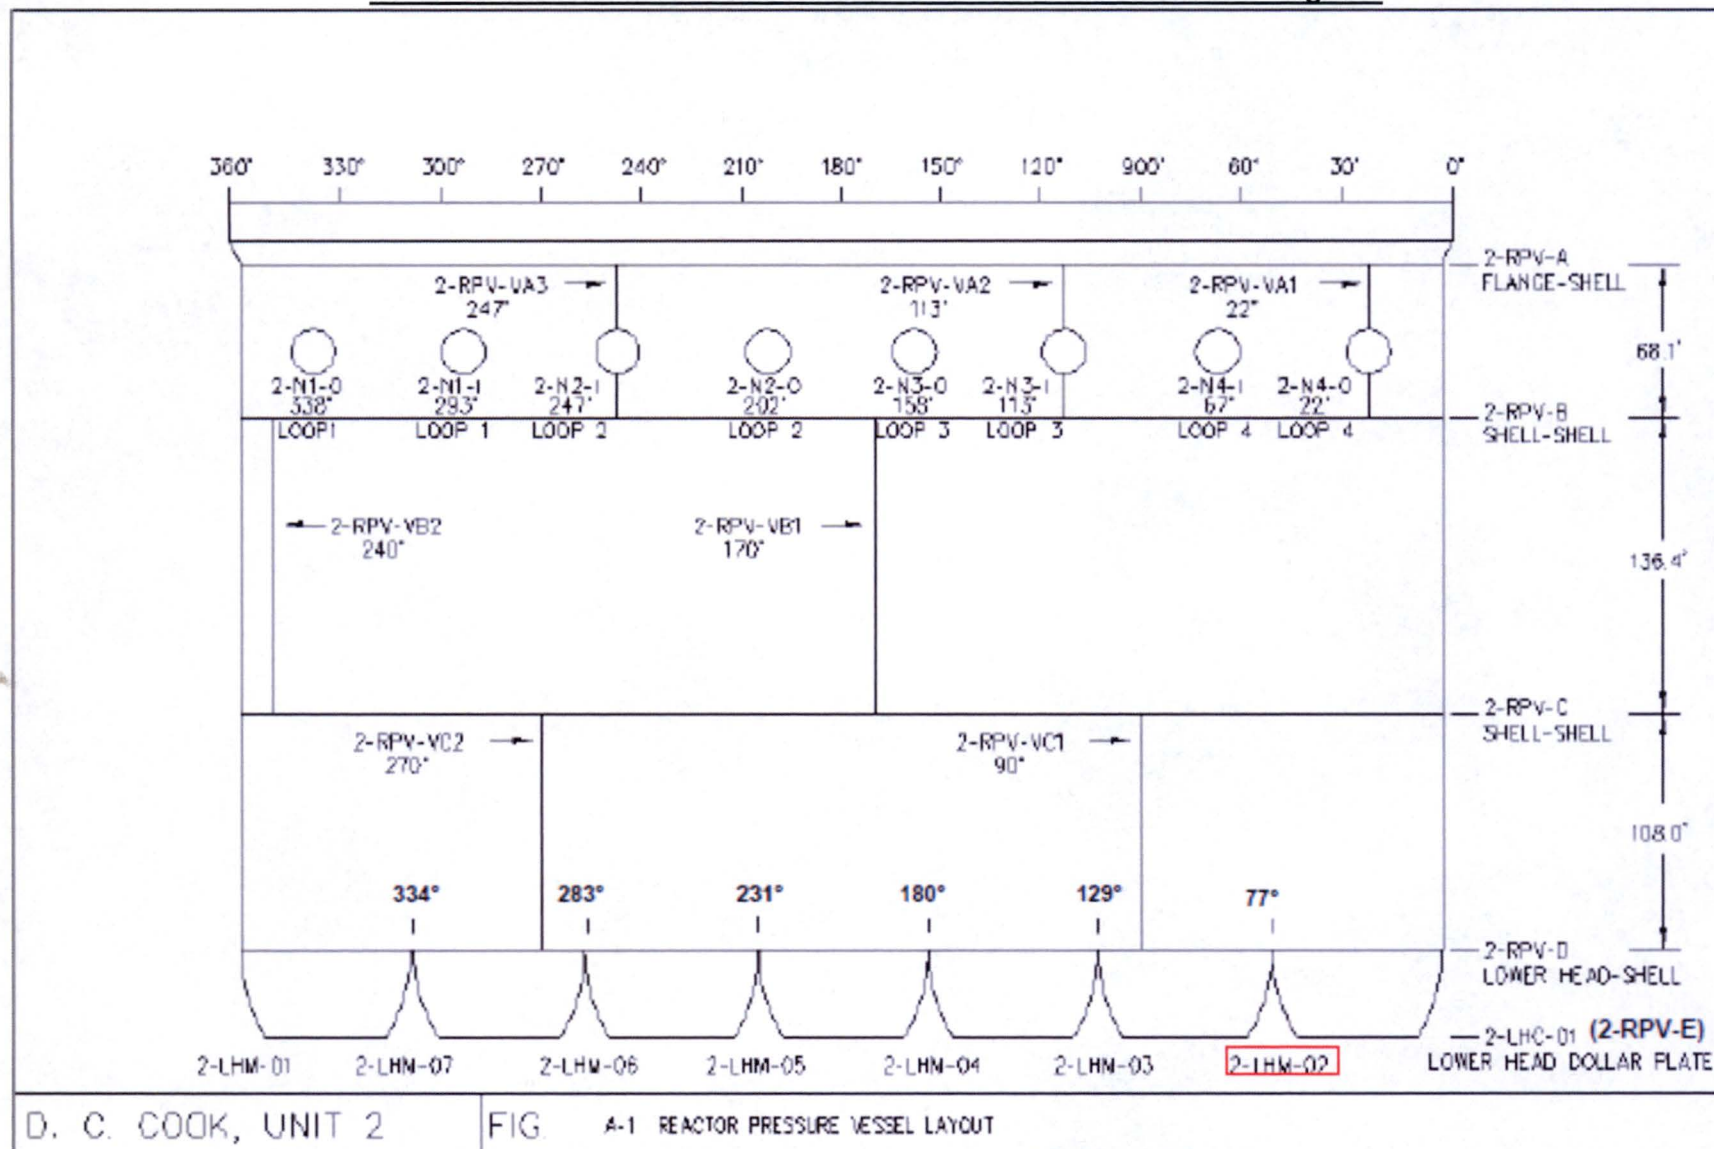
Weld 2-LHM-02 (Extracted from Reference DRAWING 2A-1)
